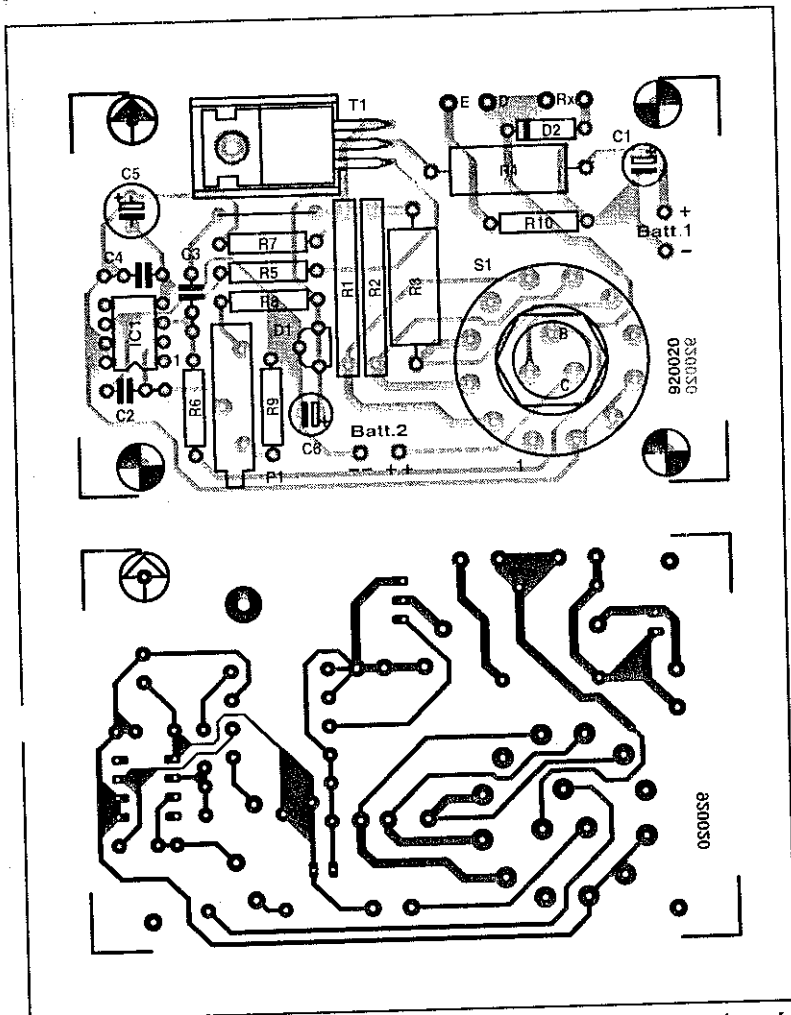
Track layout (mirror image) and component mounting plan of the adaptor PCB.
